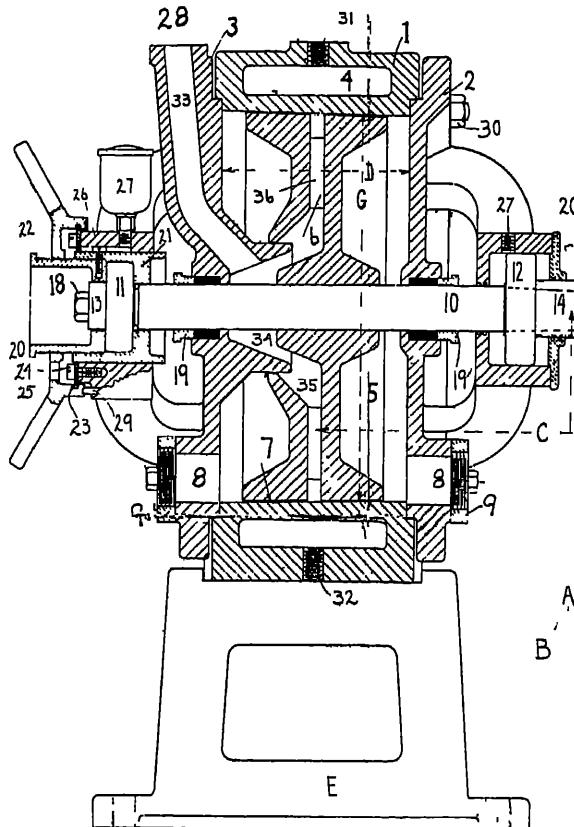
Cross-Section of Smooth-Surface Horizontal-Type Colloid Mill.
